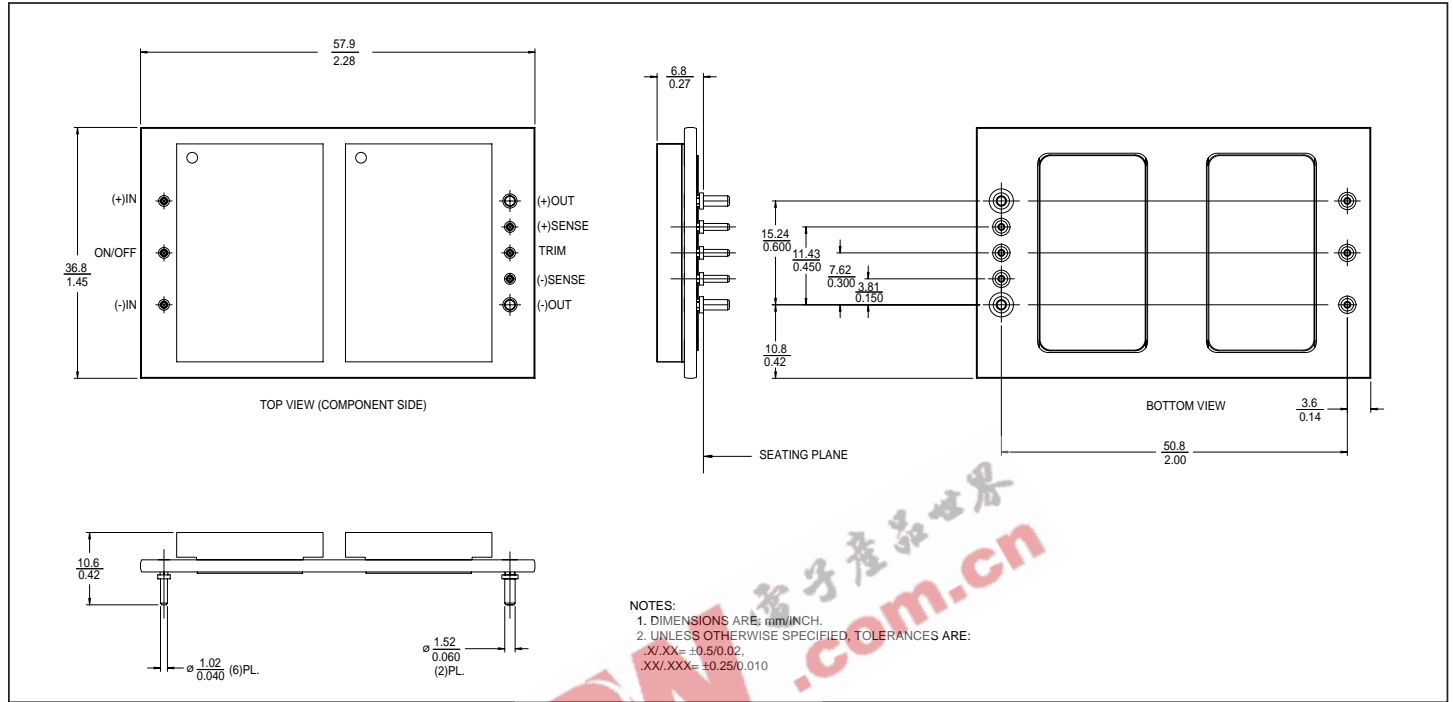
Mechanical outline and PCB footprint information; single output pin version (package style 1)
